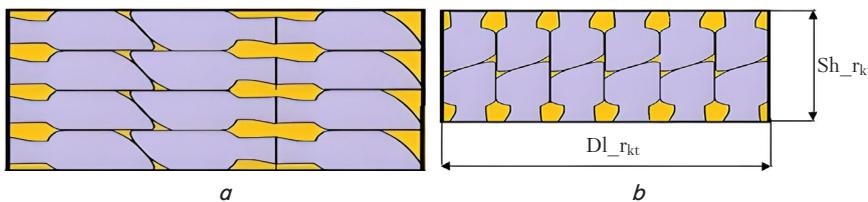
Examples of layouts: *a* – layout with a rotation of parts by 180° in a row; *b* – layout without turning parts in a row
